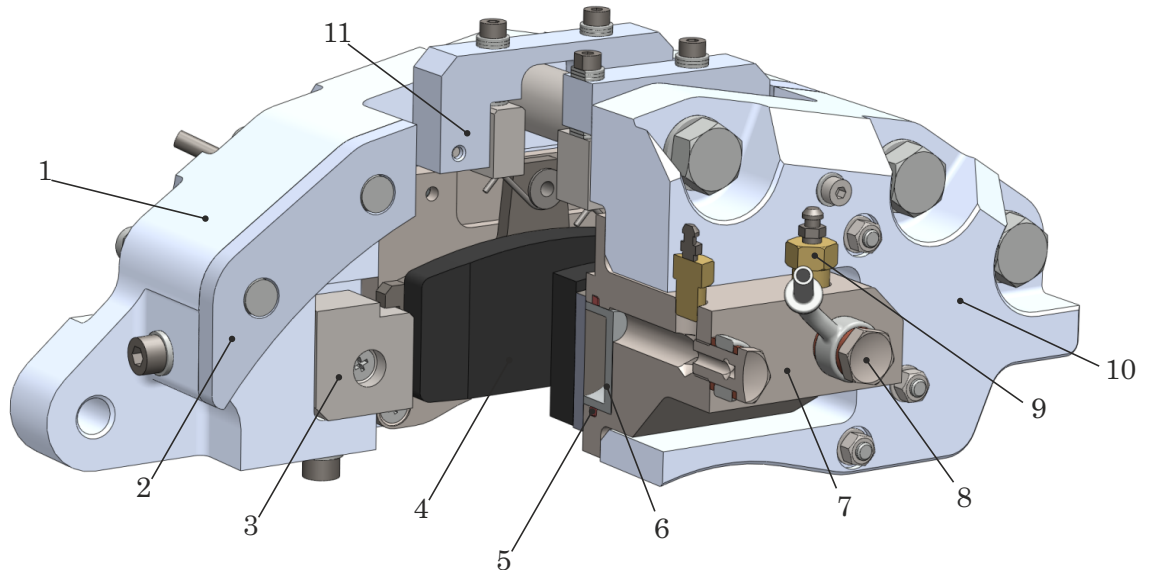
Main components of the caliper assembly: 1) inboard caliper, 2) shim, 3) abutment, 4) brake pad, 5) piston seal, 6) piston, 7) piston module, 8) banjo bolt fitting, 9) bleeding valve, 10) outboard caliper, 11) brake pad pre-load assembly.
